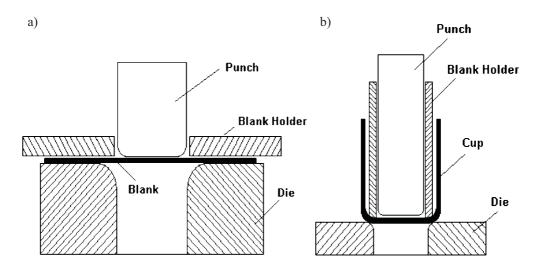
The schematic view of deep drawing operation a) First step b) Next steps
